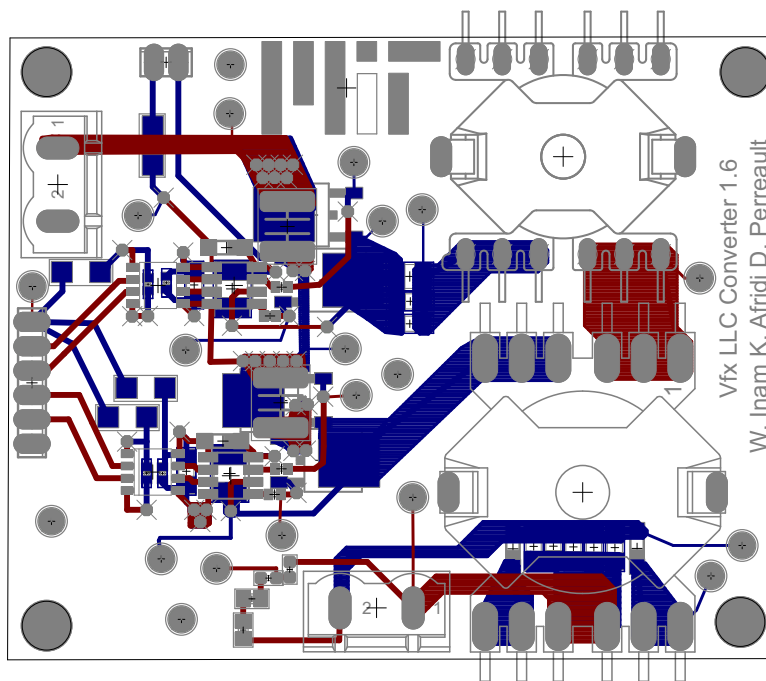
VFX converter PCB layout, top and bottom layers (zoomed 2x).
